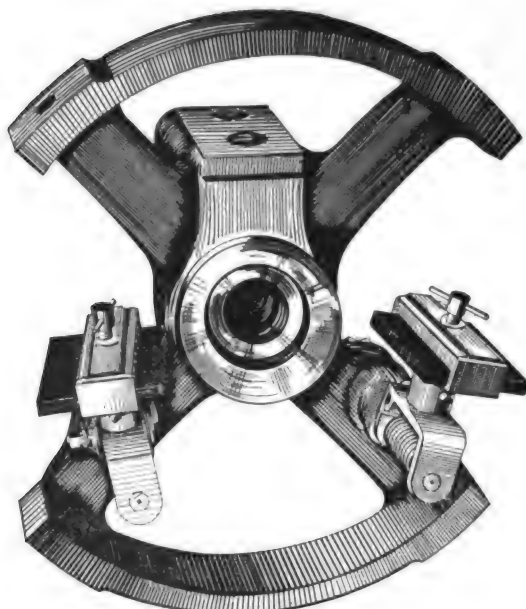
ARMATURE BEARING AND BRUSH HOLDER.
